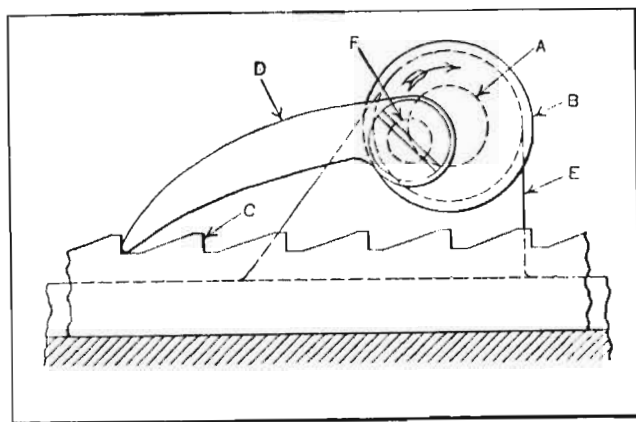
Crank-driven Pawl that Imparts a Slow Movement at Both Ends of its Stroke to Prevent Jerking and Over-run
